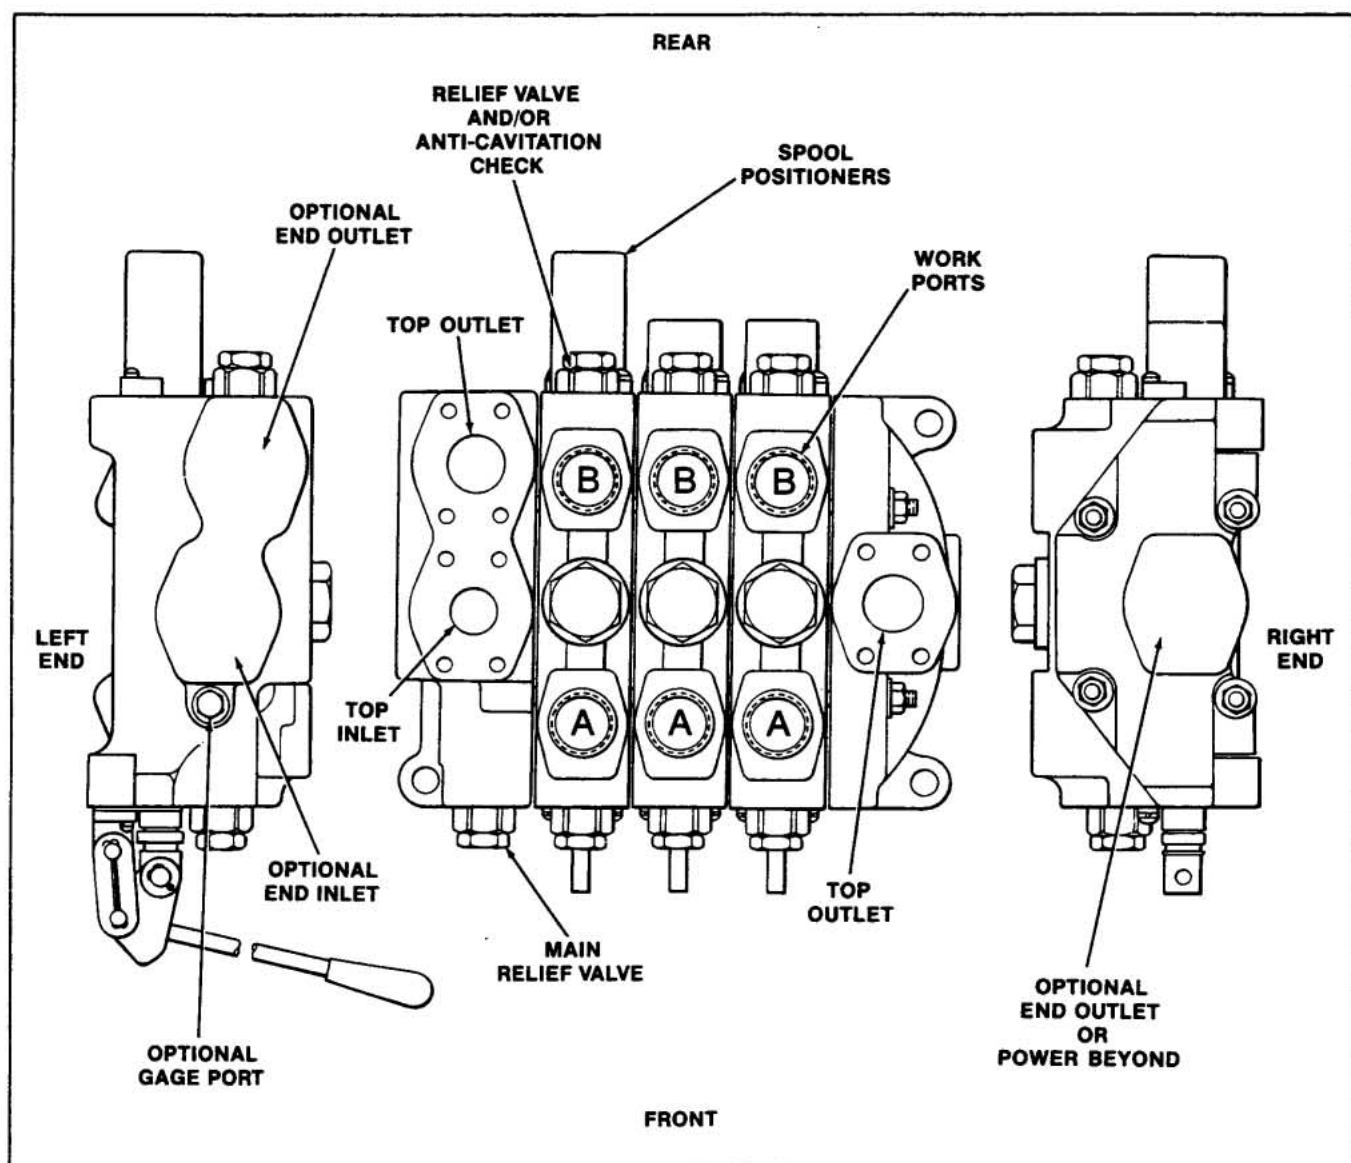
Schematic view of a typical Model V70 Control Valve Assembly.
